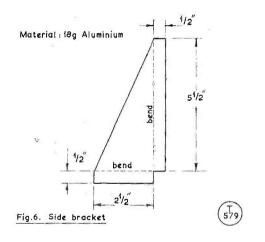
Bracket detail for the chassis-panel arrangement, the aerial and Rx sockets being mounted where convenient. Positions will depend on the size and placement of the aerial relay and other parts.
